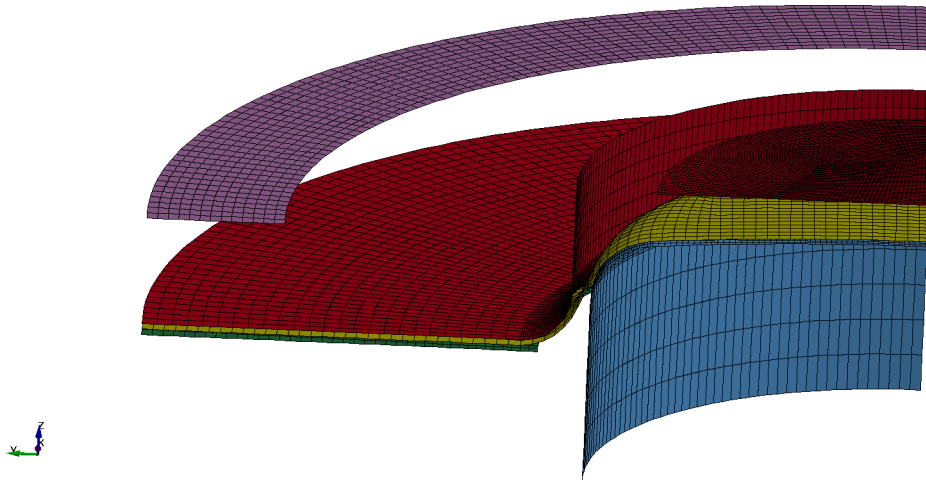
The fifth forming step, where the red part is the die 10, yellow: the blank, Green: Blank Holder, blue is Punch 9, and purple is the blank holder 2.
